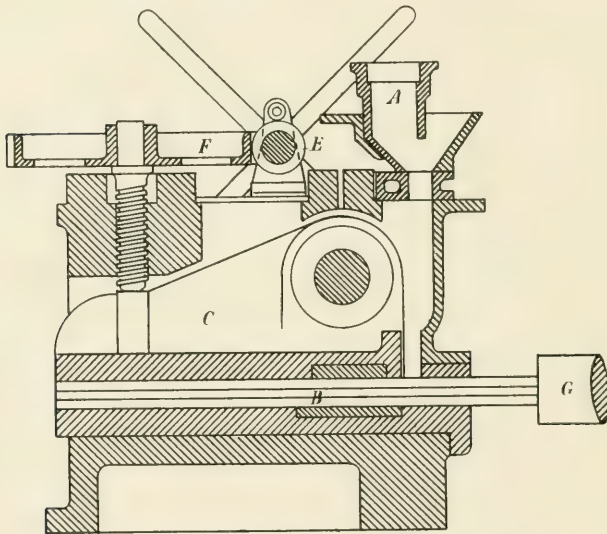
Exter's Peat Machine—Sectional Elevation.
